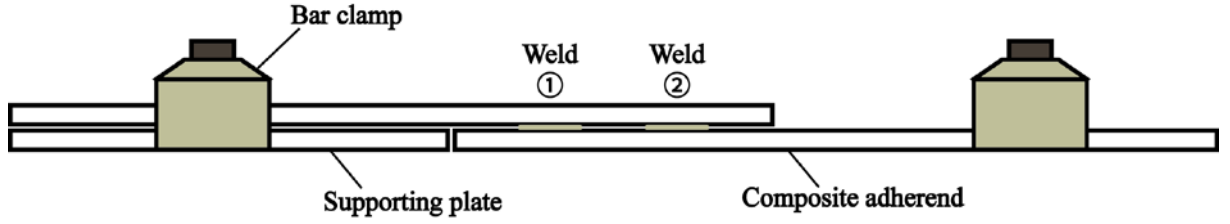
Schematic of the sequence followed for the sequential welding of the DSW joints with Jig 1. “Weld 1” and “Weld 2” refer to the spot welded in the first and in the second place, respectively.
